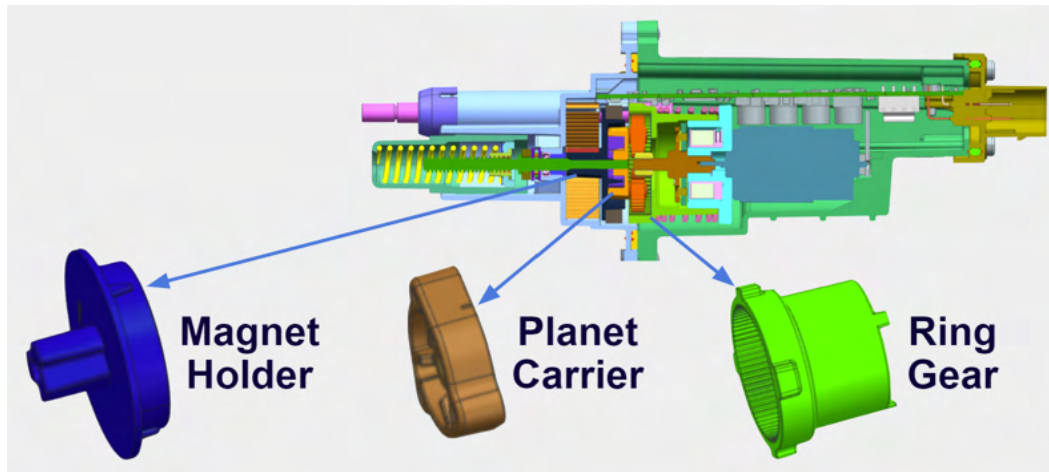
The general positions of the magnet holder, planet carrier, and ring gear are shown on a cross-section view of the SmartBar actuator [14]
